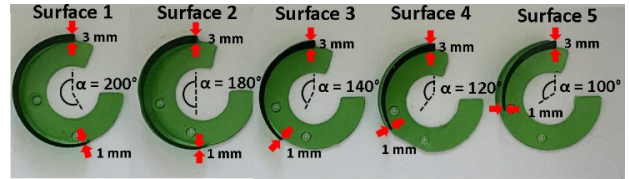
Bottom section view of the design of Surfaces (1-5) showing curvature change over range of α values.
